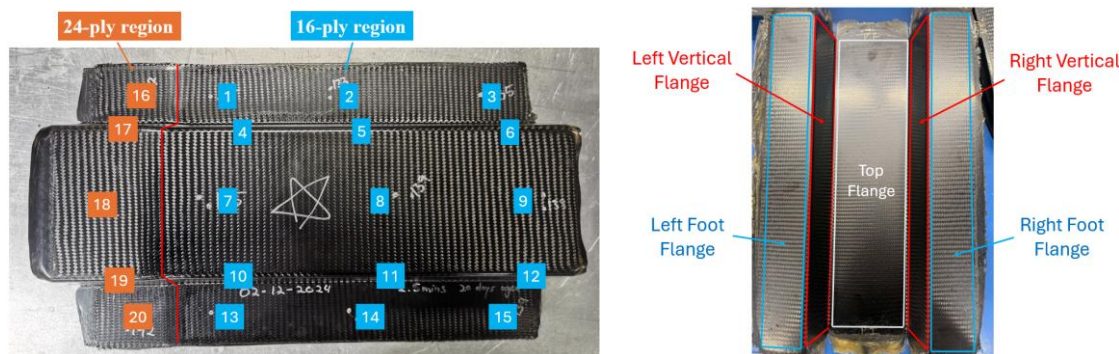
(left) Illustration of 20 thickness measurement locations and (right) Illustration of the different geometric zones of the manufactured part intended for inspections.
